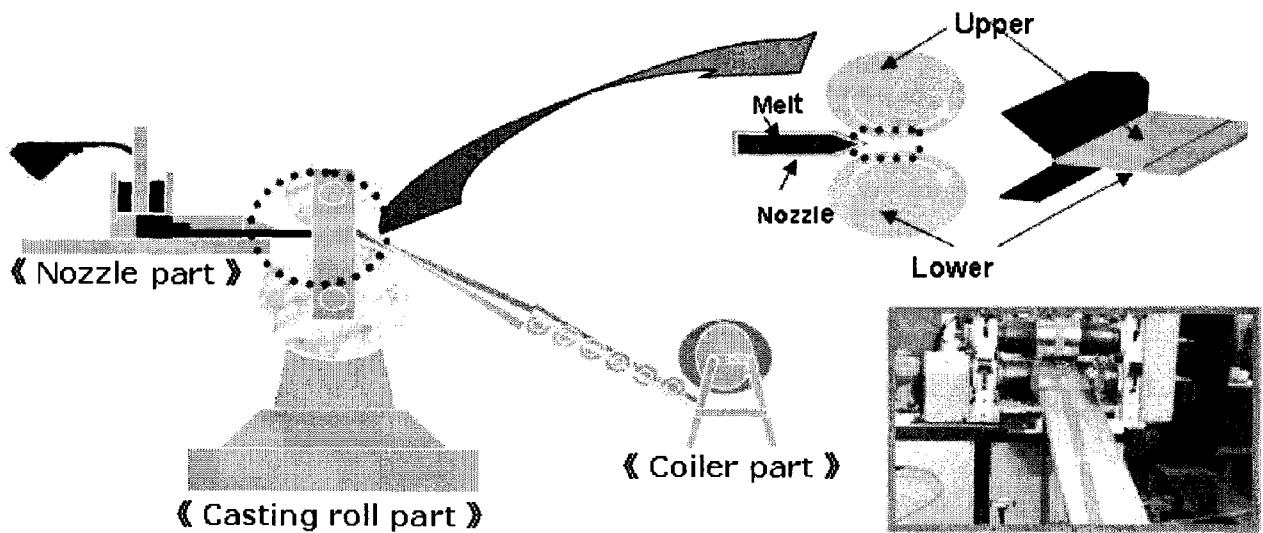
Manufacturing a Ag-27%Cu-25%Zn-3%Sn strip through twin roll strip casting.
